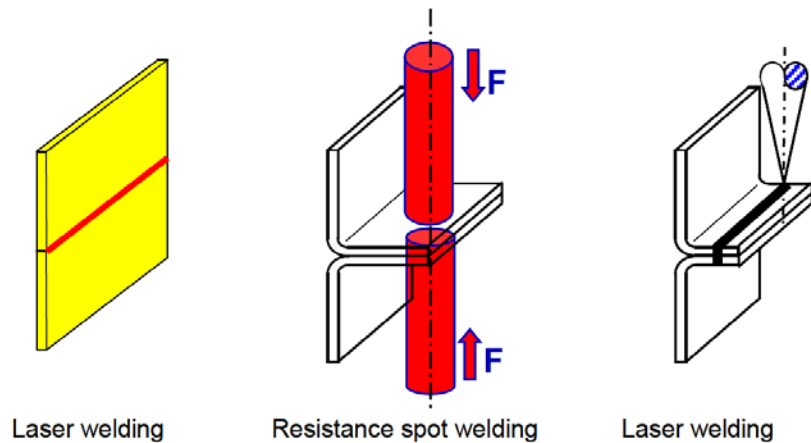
Example of a flange reduction or elimination using laser welding compared to resistance spot welding process [54]
